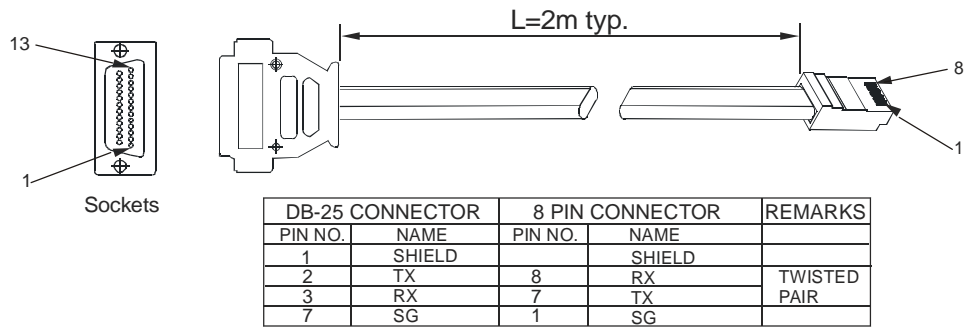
RS232 cable with DB25 connector (P/N: GEN/232-25)
